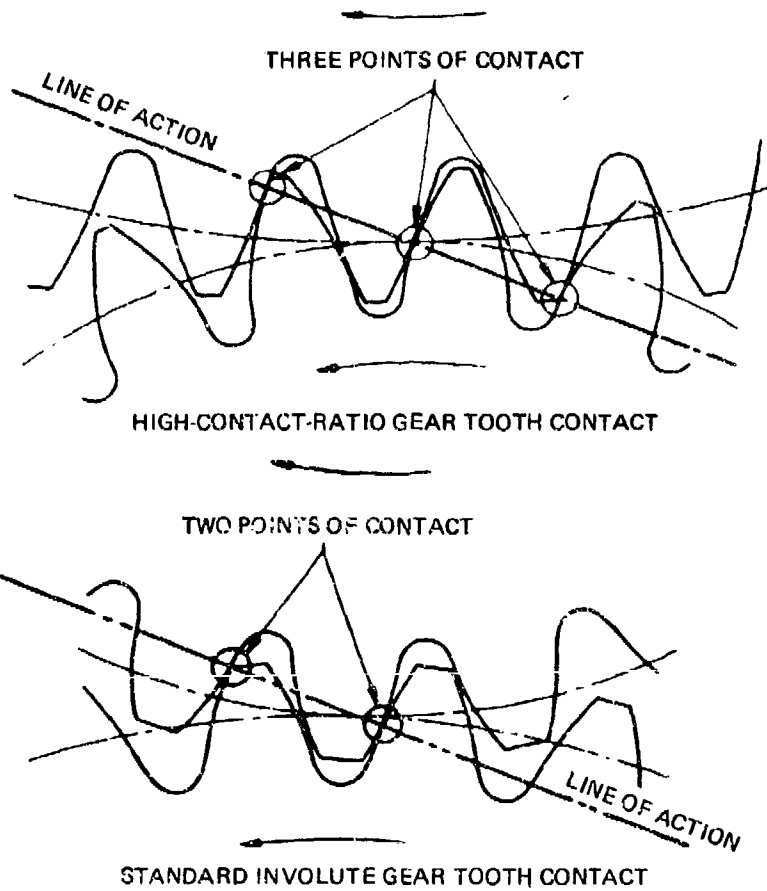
Basic Meshing Principles of Standard Involute and High-Contact-Ratio Gearing.
